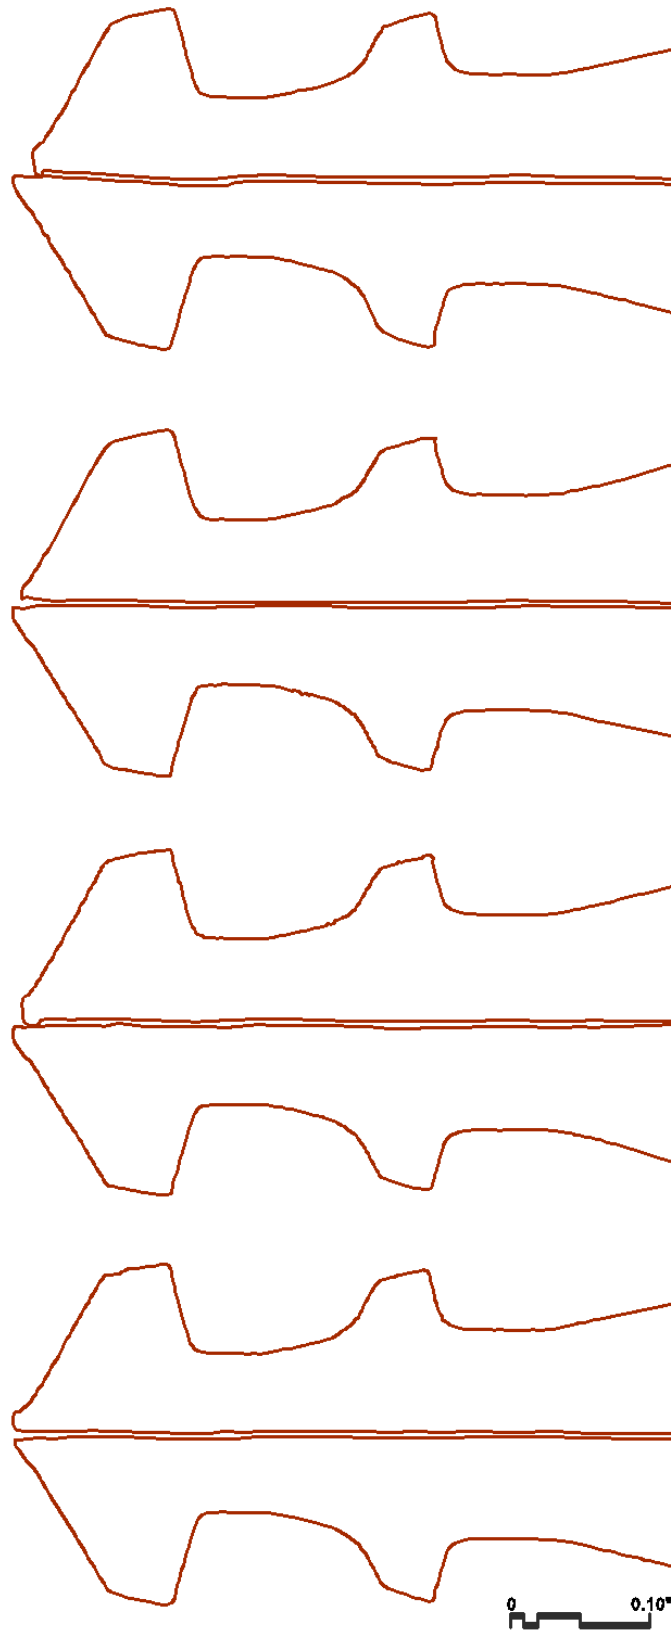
As-Built 0.104 in. Tube-B Coined Pressed-End CAD Generation - Step 4
